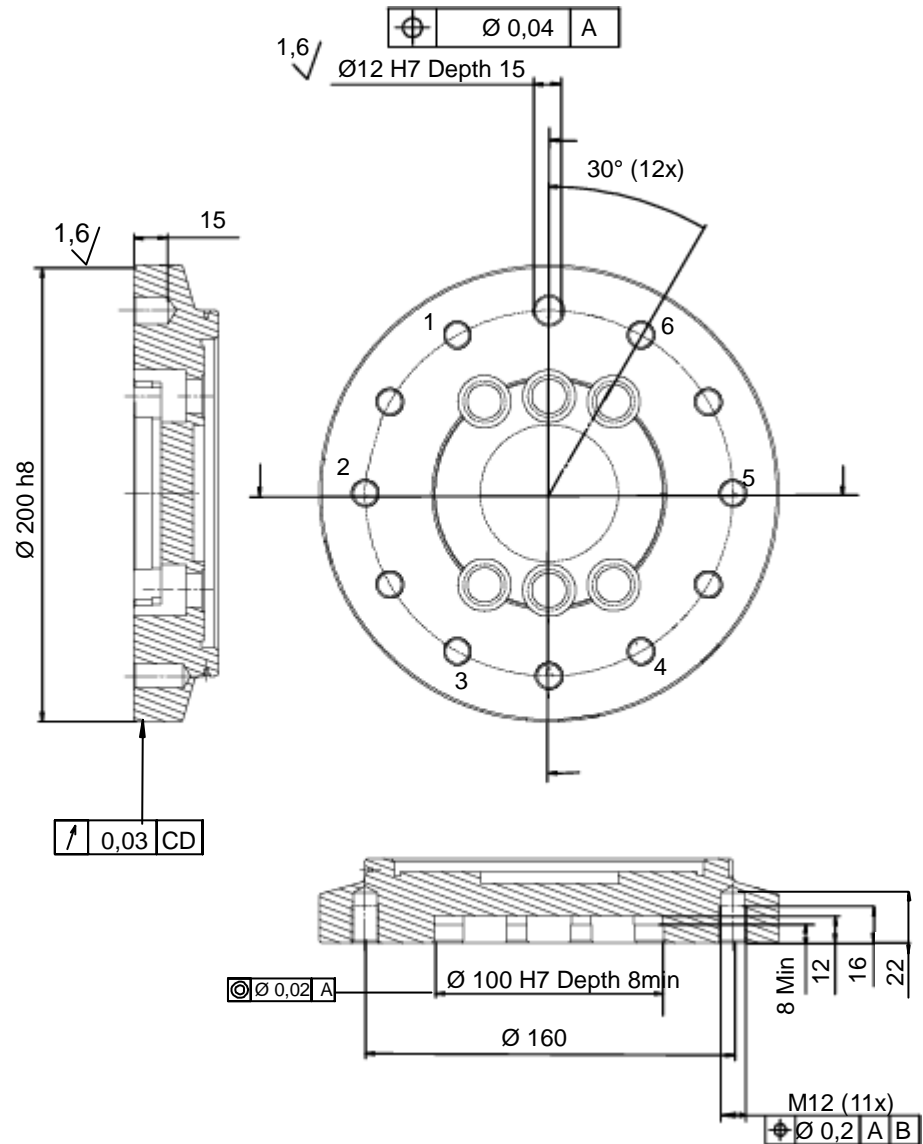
Robot tool flange ISO/DIS 9409-1:2002 (dimensions in mm).
